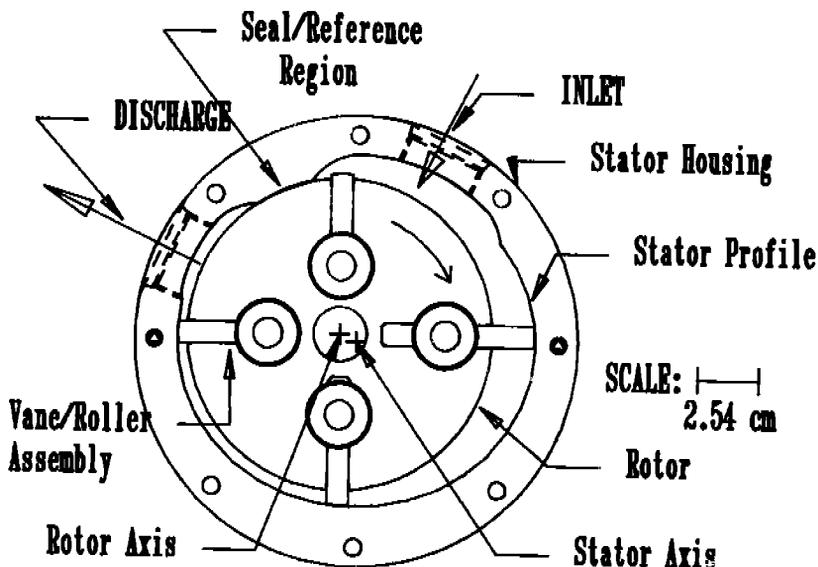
Frontal Assembly Drawing of the ROVAC Model 230 CRV Machine
